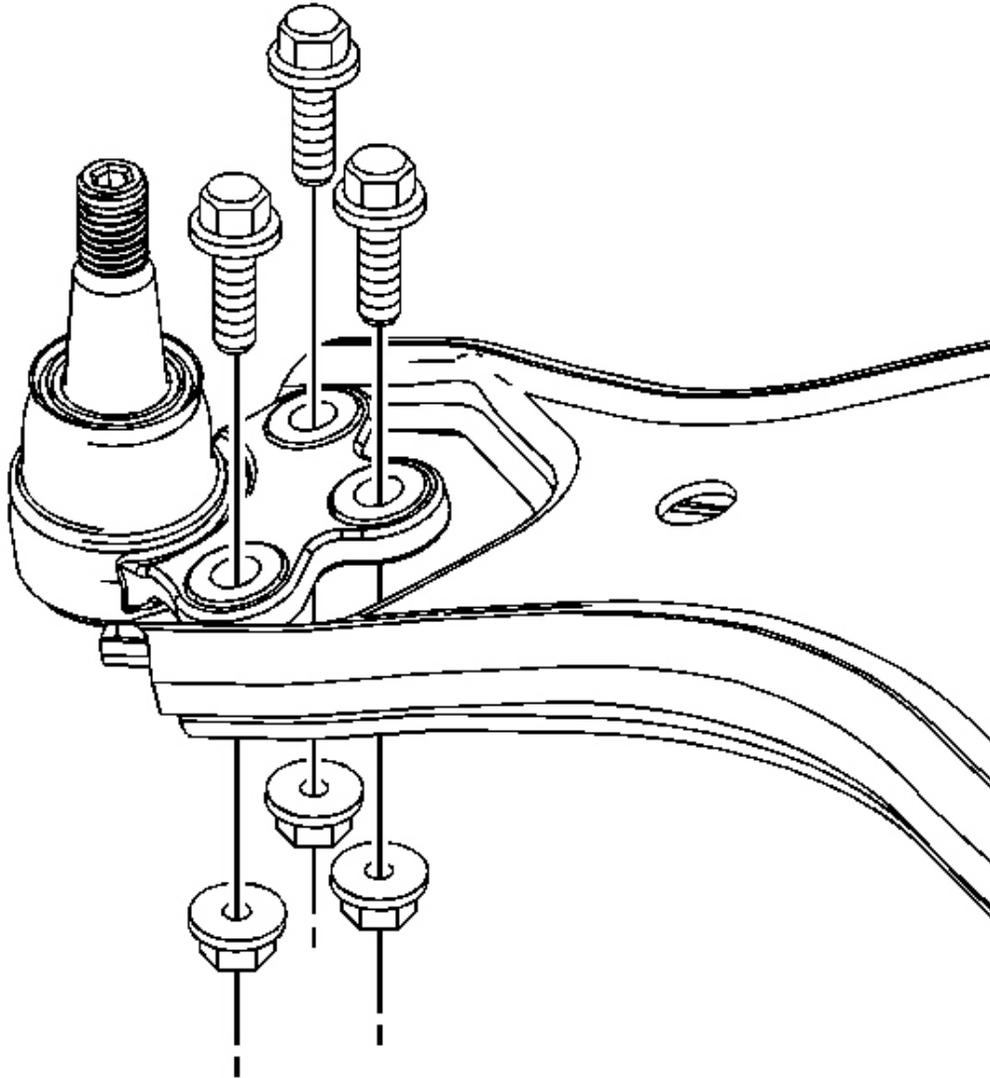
View Of Ball Joint Mounting Nuts & Bolts
